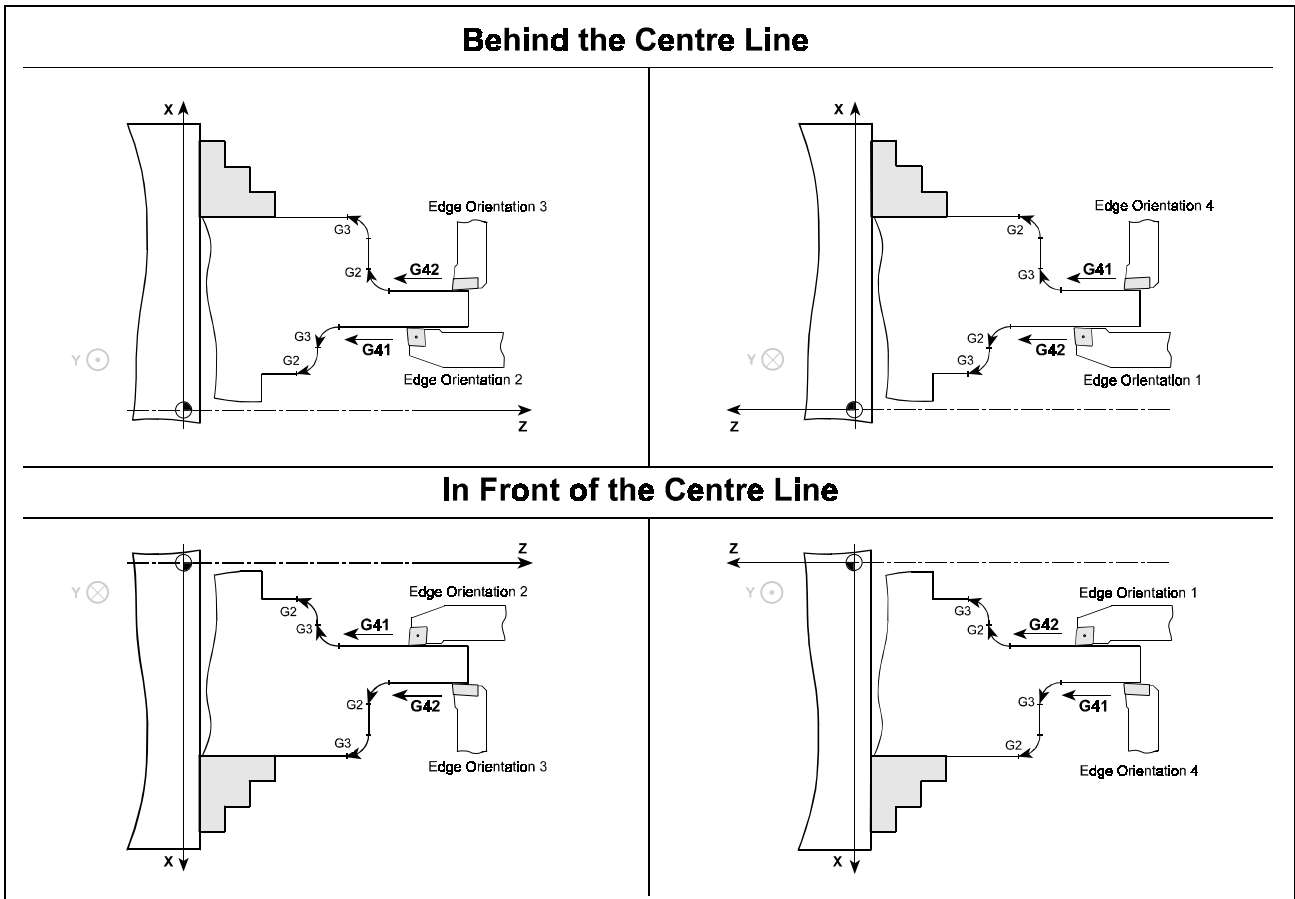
Tool Nose Radius/Cutter Radius Compensation in G18 Plane
